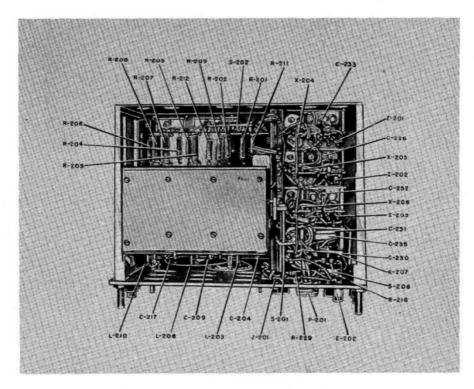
Receiver Unit — Bottom Open View (older model shown; see note for Fig. 1)
